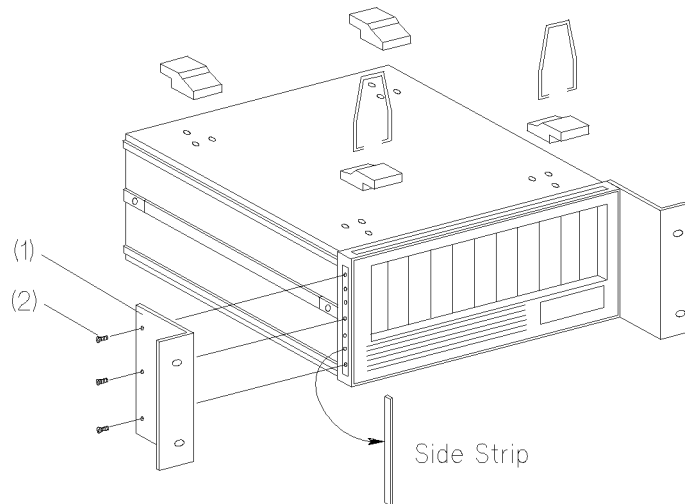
Attaching Rack Flanges to the HP 4142B
